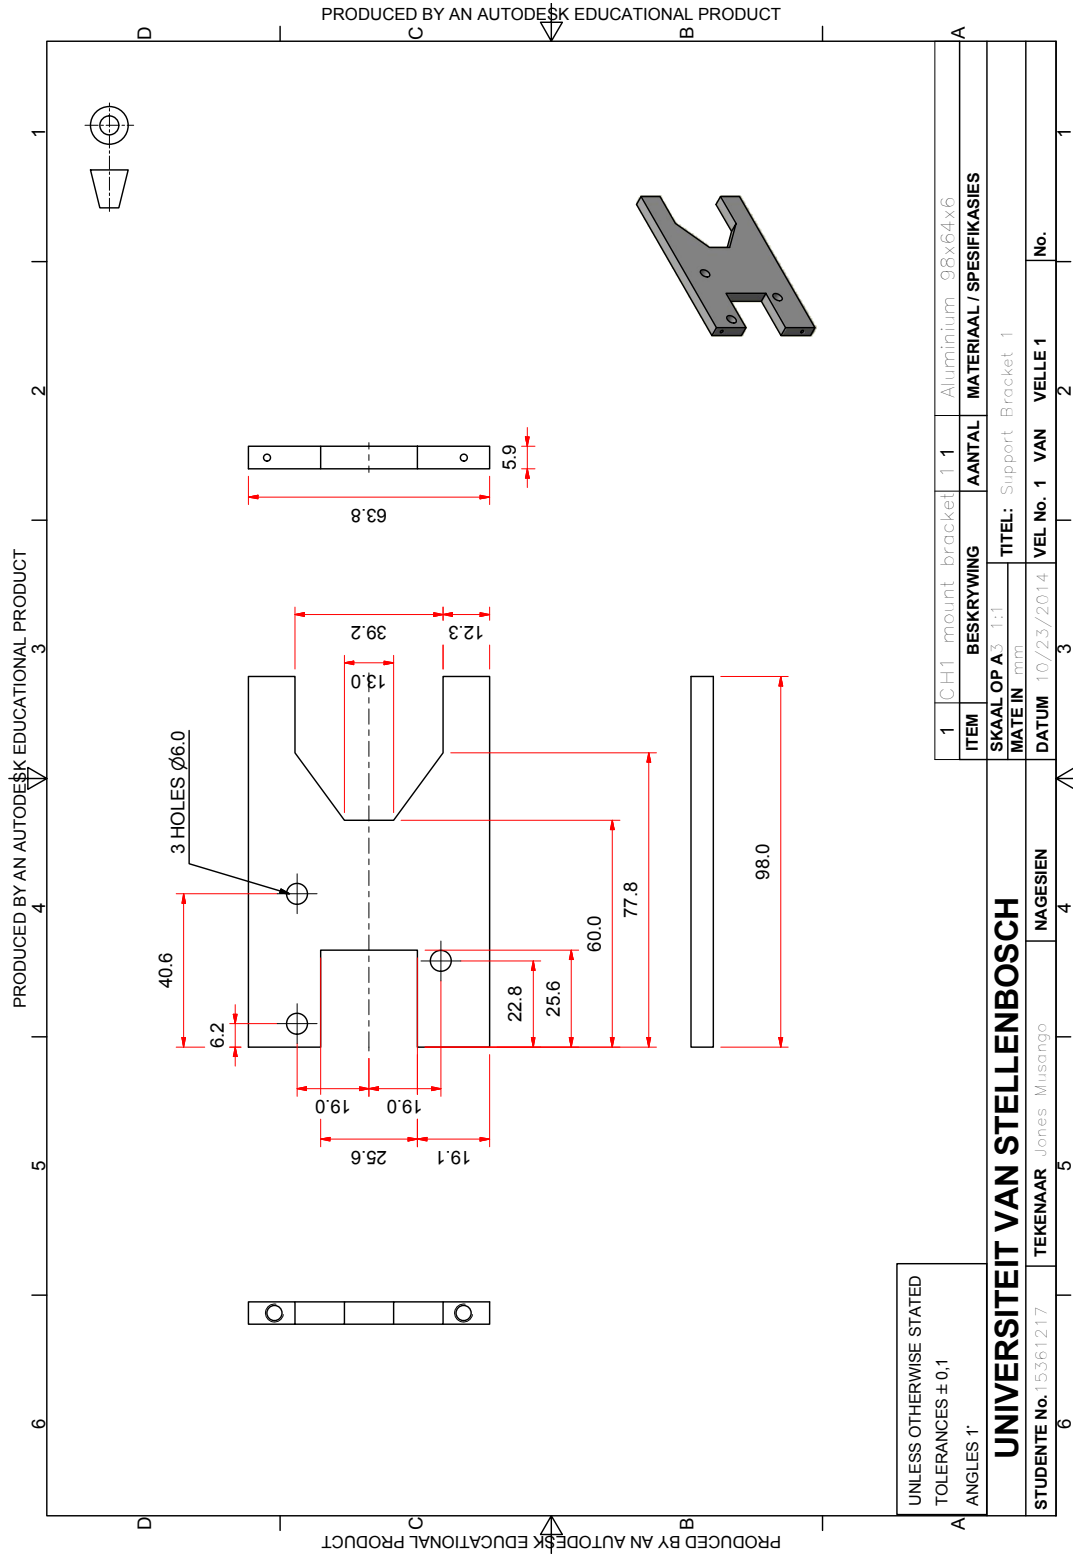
Pyrheliometer (Kipp & Zonnen CH1 mounting clamp 1
